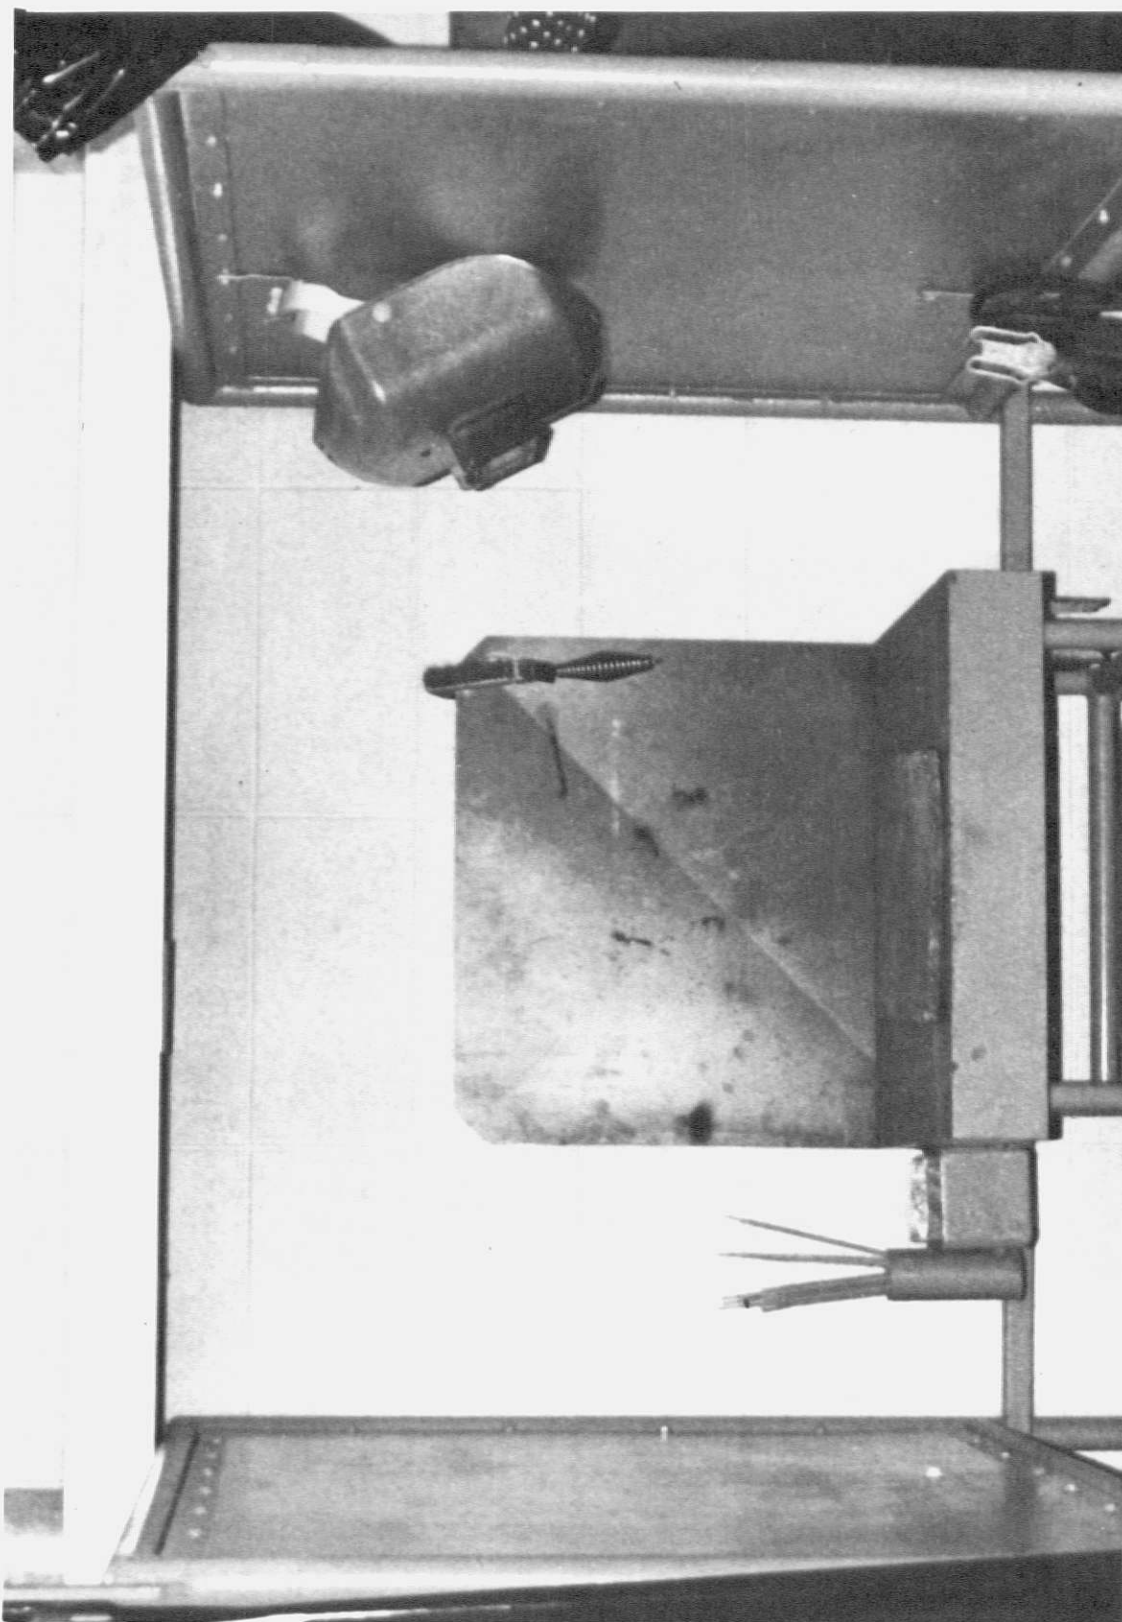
Front View of the Booth Showing the Two Ducts Through Which Contaminated Air is to be Exhausted.
